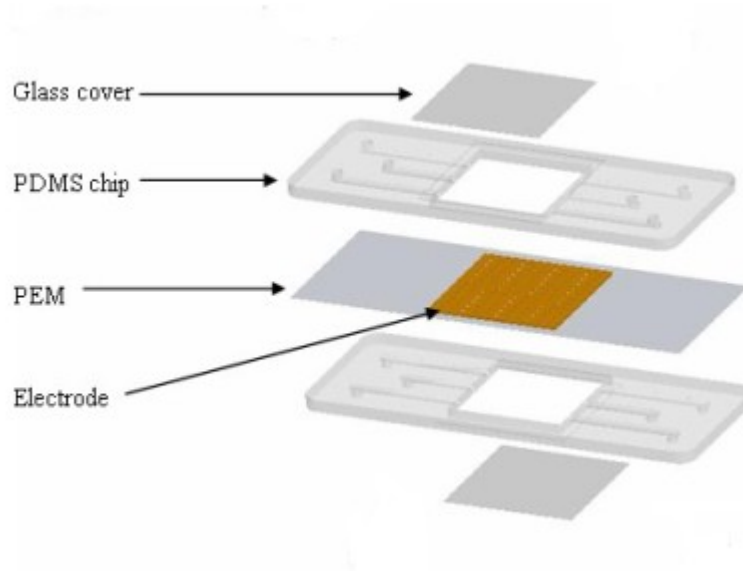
Exploded view of the unassembled model of μ PSC
